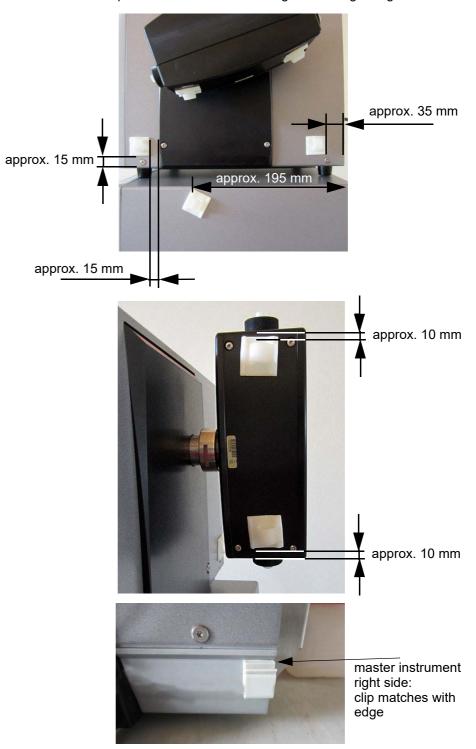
4 Positioning the cable clips (hose guidances)
